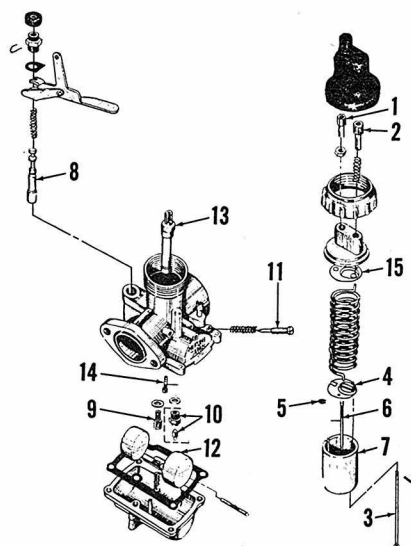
Exploded view of typical Mikuni carburetor used.
